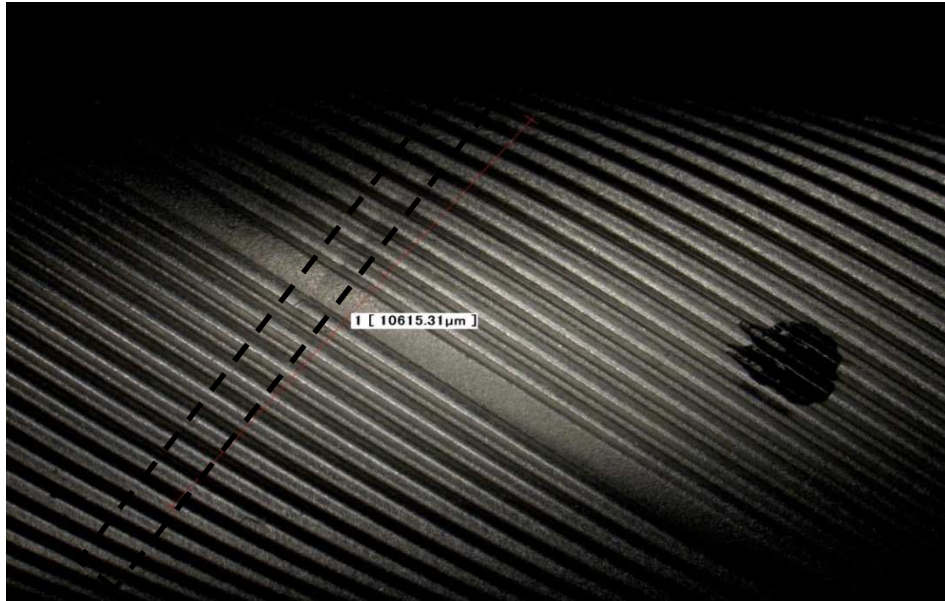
Perpendicular to flow crack in WC-Co sintered sample with rifling
